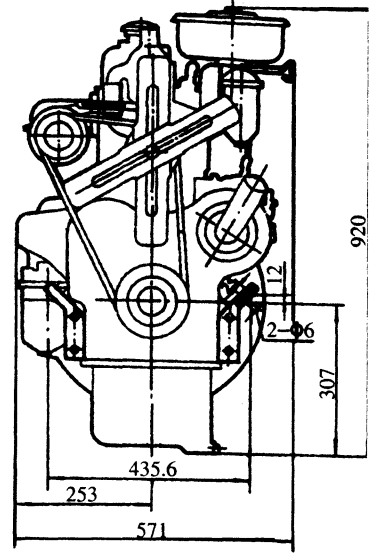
Outline drawing for 495G10, 495G14 diesel engine
